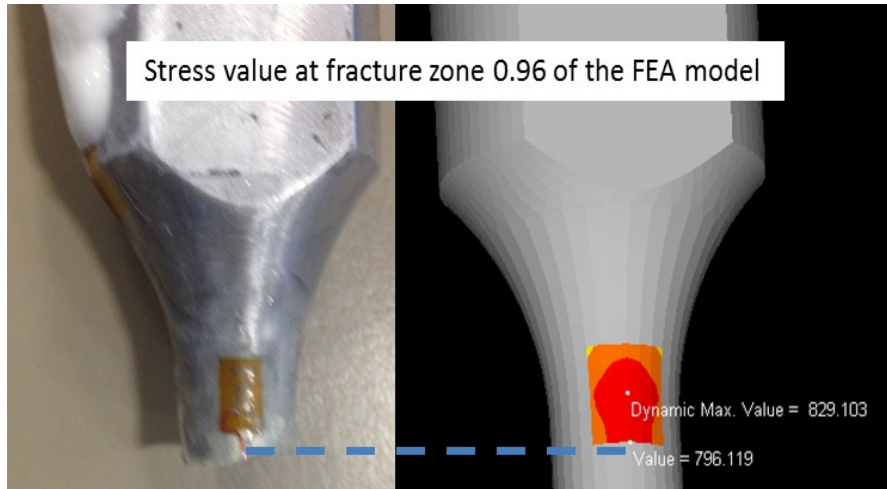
Specimen Strain Gage Location vs. Fracture
